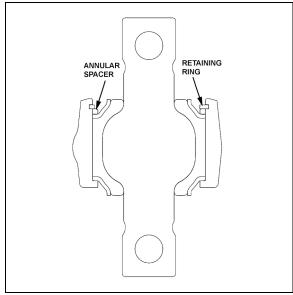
LOWER A-ARM BALL PIN BUSHING 16047
